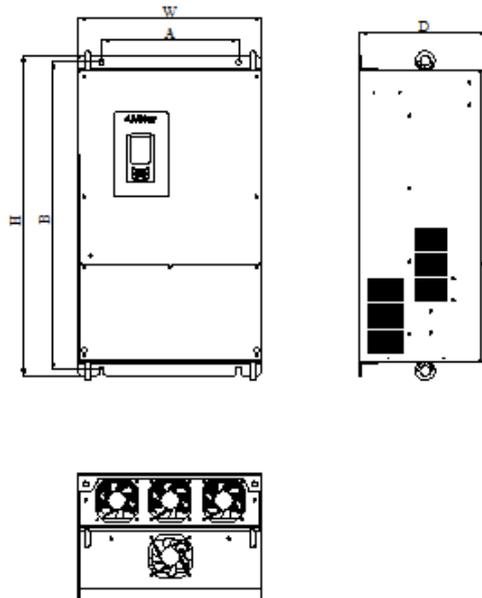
Installation dimensions of AS450 4T0030~4T0355
